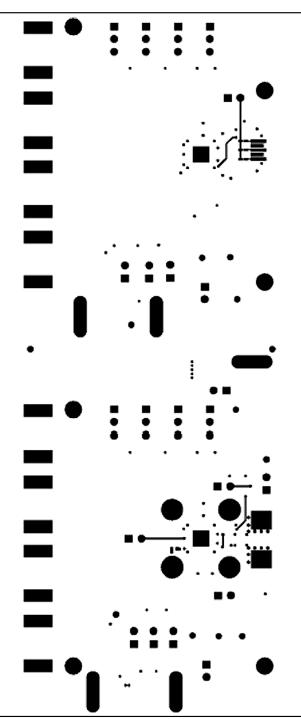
MAX3865 EV Kit PC Board Layout—Solder Side
